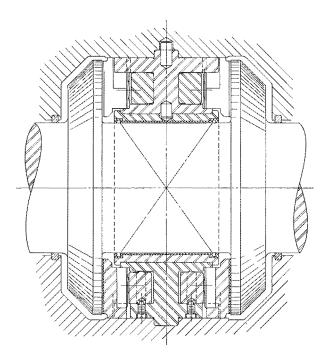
Compact equalizing thrust bearing built around a split journal bearing. The two collars are integral with the shaft.
